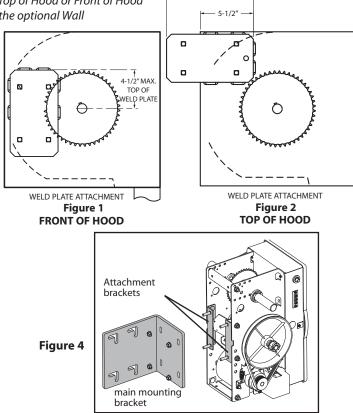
& Fig. 2 . It is possible to mount the RMX® Operator on either side using the optional Wall
